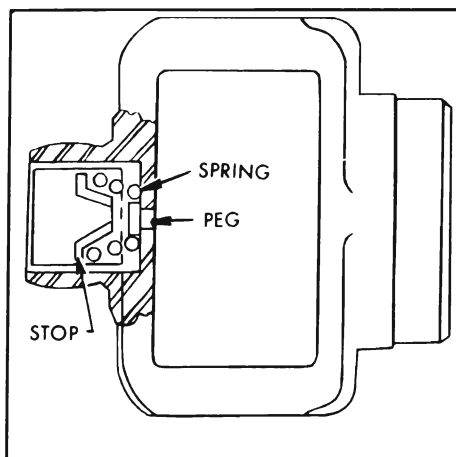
Stop, Spring, and Peg Position in 4-Speed Propeller Shaft
